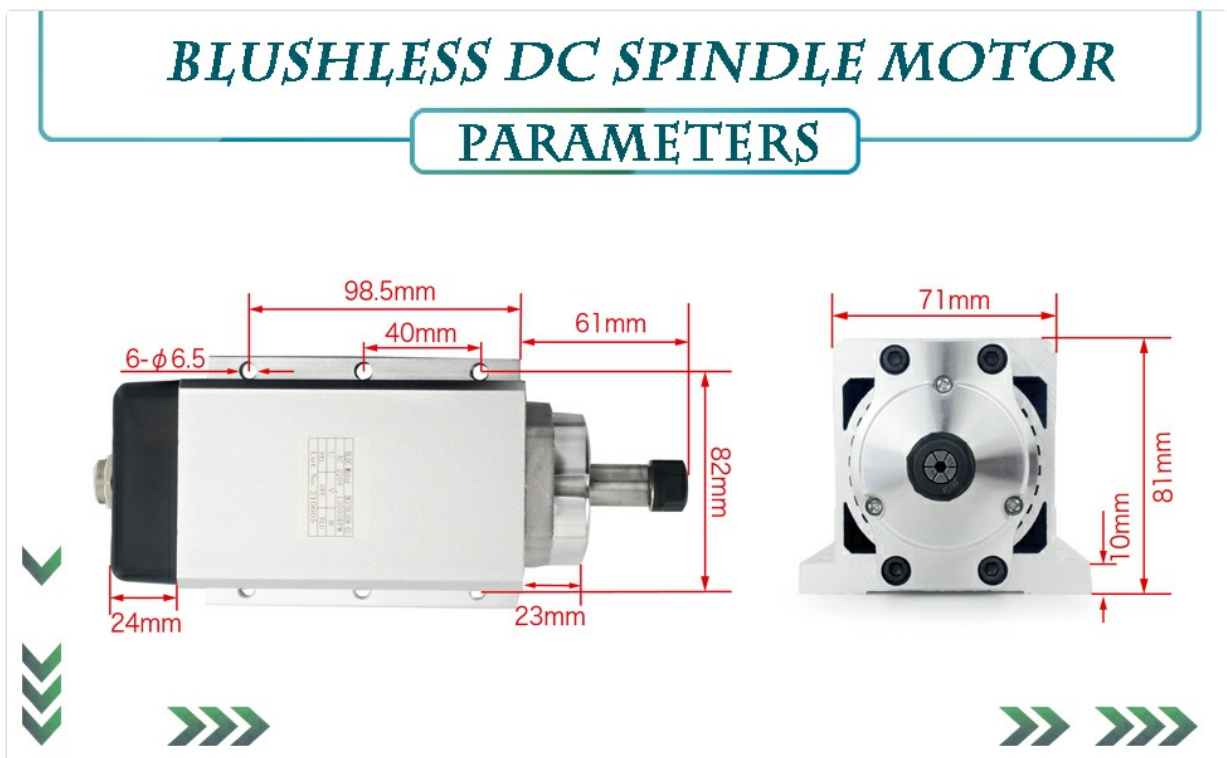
JK57BLS08-05 Brushless Spindle Motor Dimensions.
